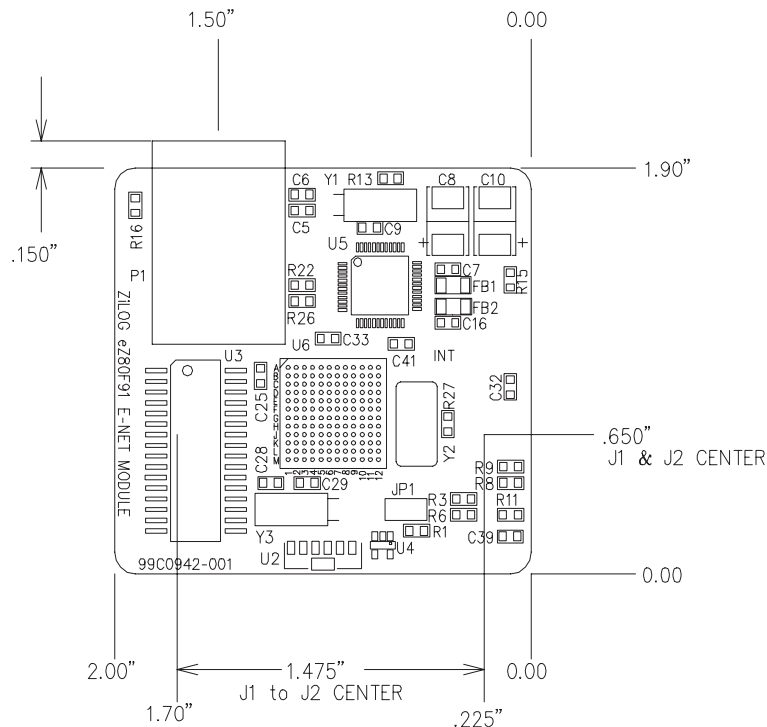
Physical Dimensions of the eZ80F91 Mini Enet Module
